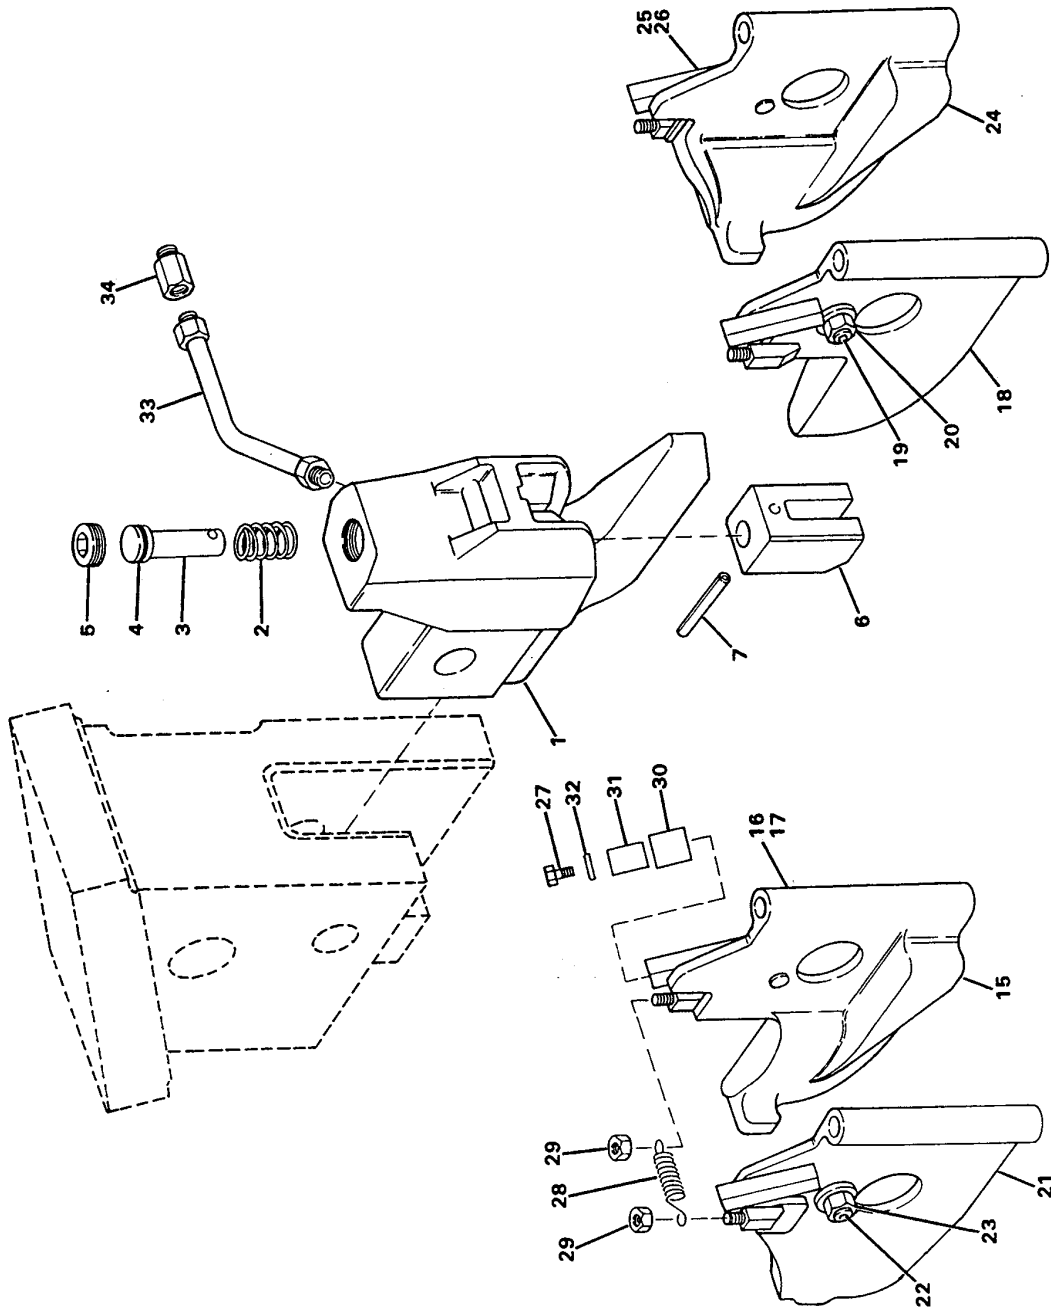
ANCHOR TOOL SUPER FAIR S/N 680232 and Above
